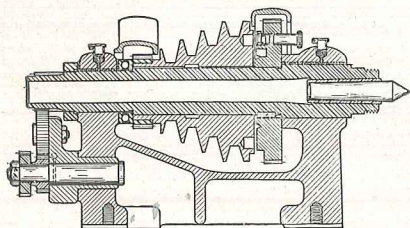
Section of "Workshop" Lathe Headstock with 4-Step V-Belt Cone Pulley
